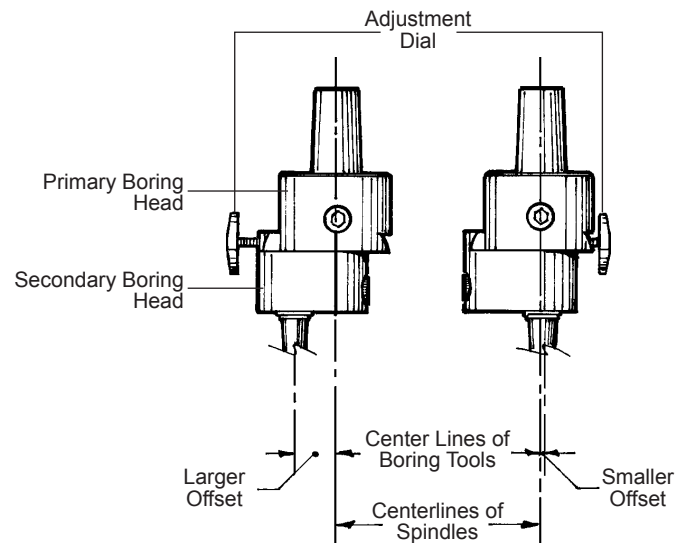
Reversing the lower portion of boring head for large or small holes.
